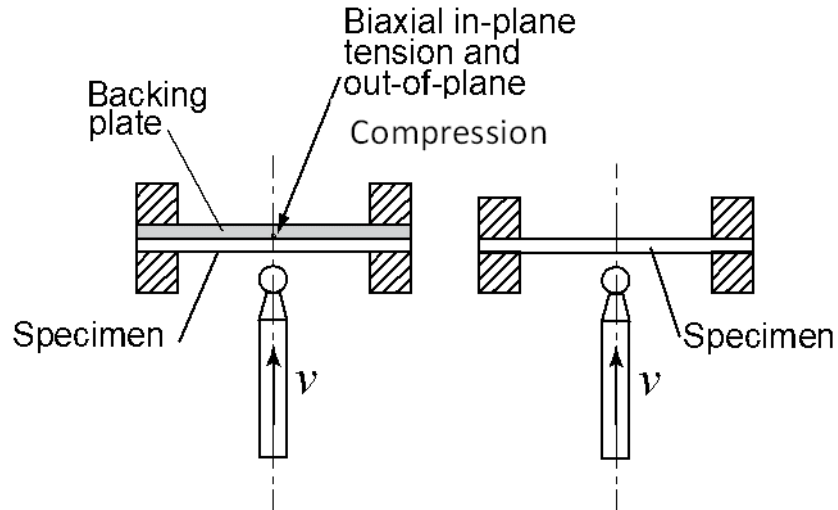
Punch test with a backing plate (left), and without a backing plate (right)
